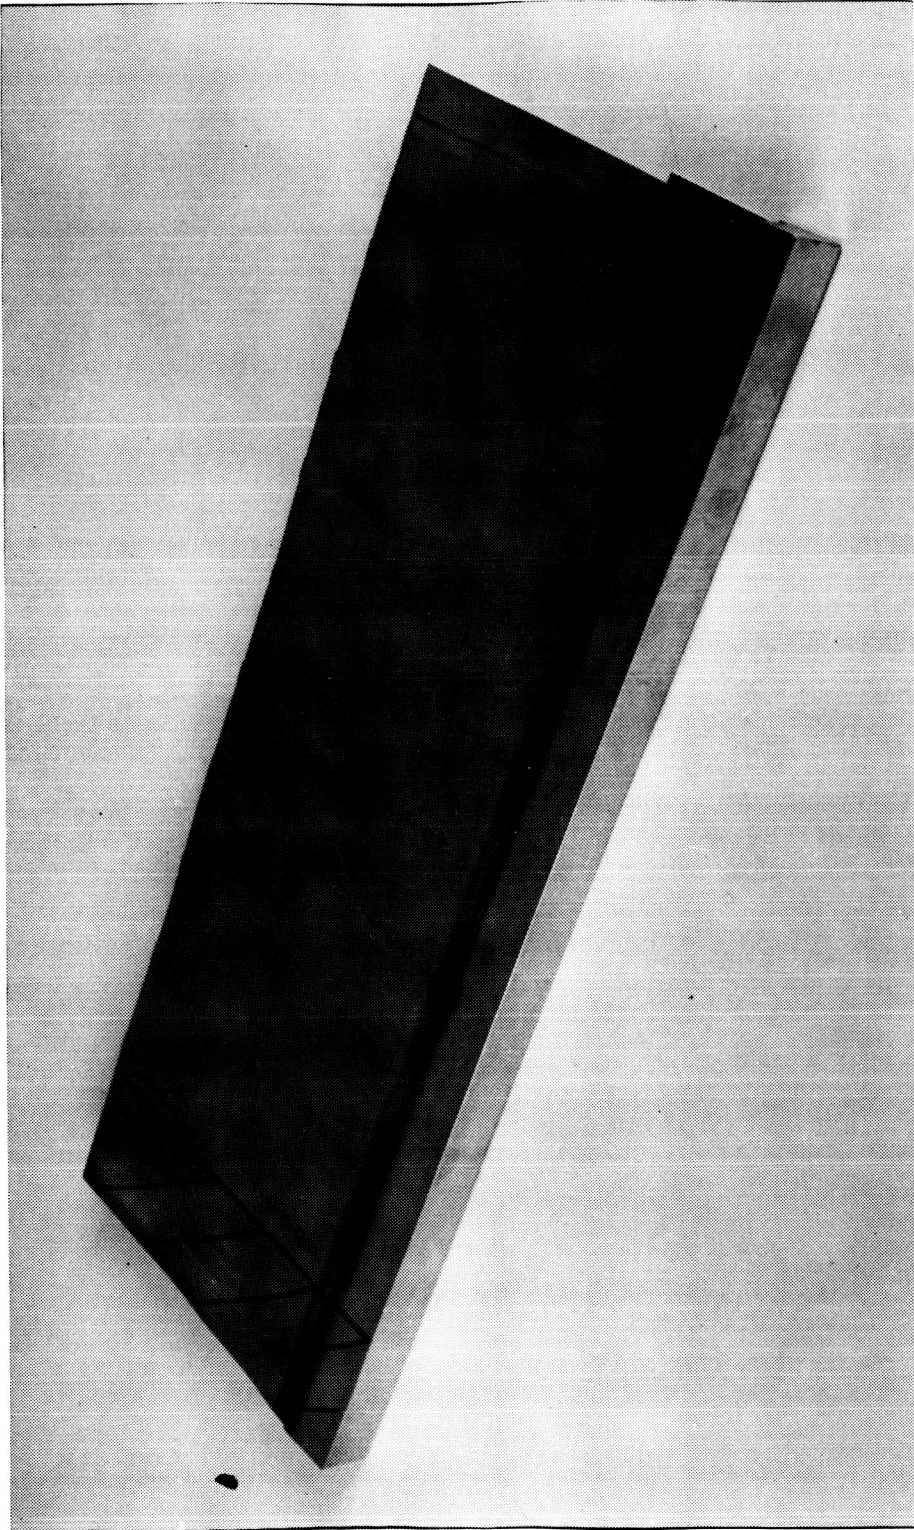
Test Panel Simulating Aft Panel/Ring Joint
